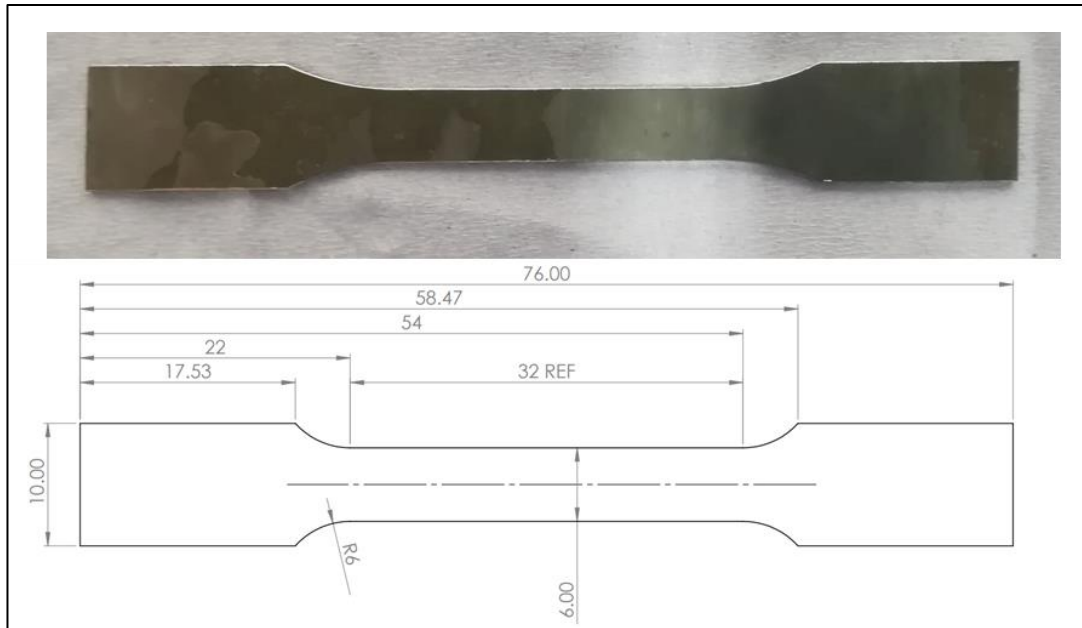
Dimensions of ASTM approved tensile bar for the 20 g rolled samples with units shown in millimetres
